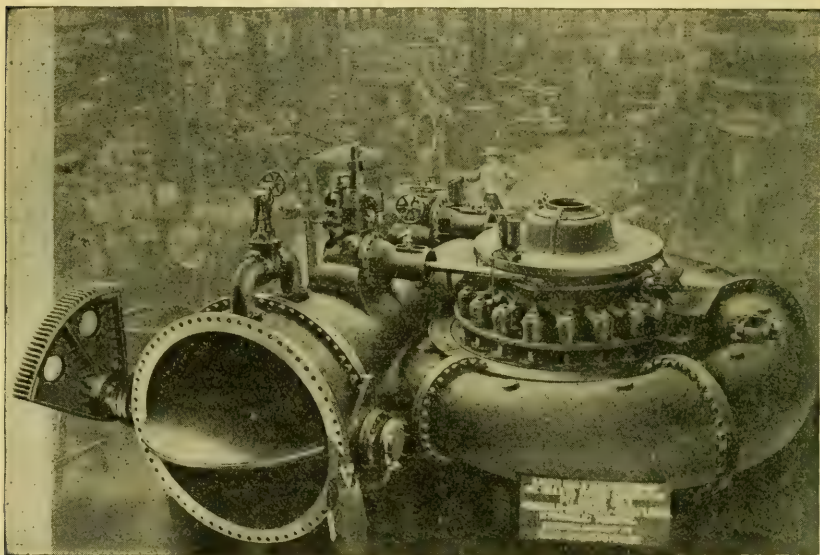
40,000 H.P., 275 R.P.M. Turbine. Pit River No. 1 Development of the Pacific Gas and Electric Company. Showing Integral Type of Governor and Pivot Valve. (Manufactured by the Allis-Chalmers Company.)
